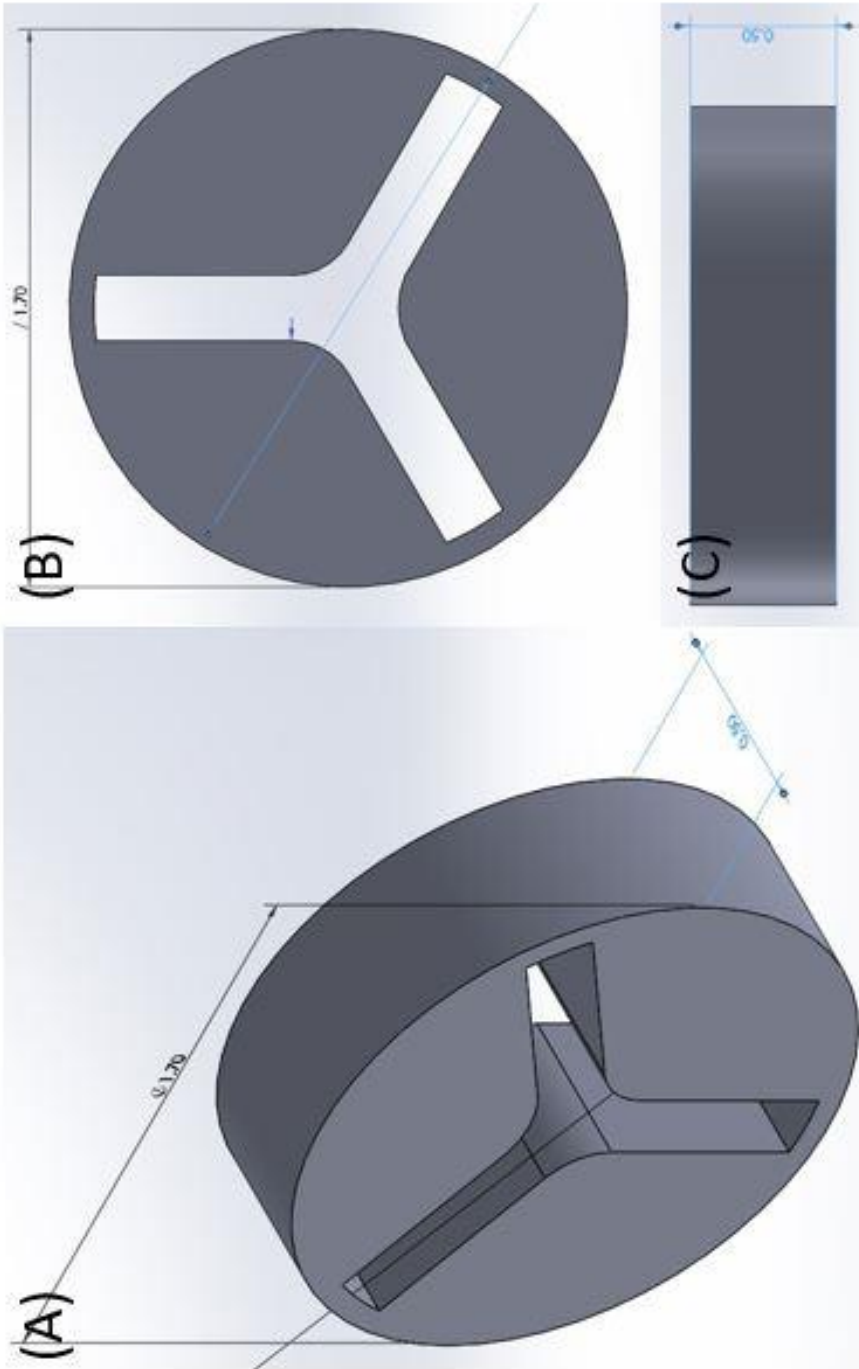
Dimensions of the disc. (A) 3D view showing the dimensions of the disc from different planes, (B) top view showing the diameter of the disc 17 mm, and (C) side view Showing the thickness of the disc 5 mm.
